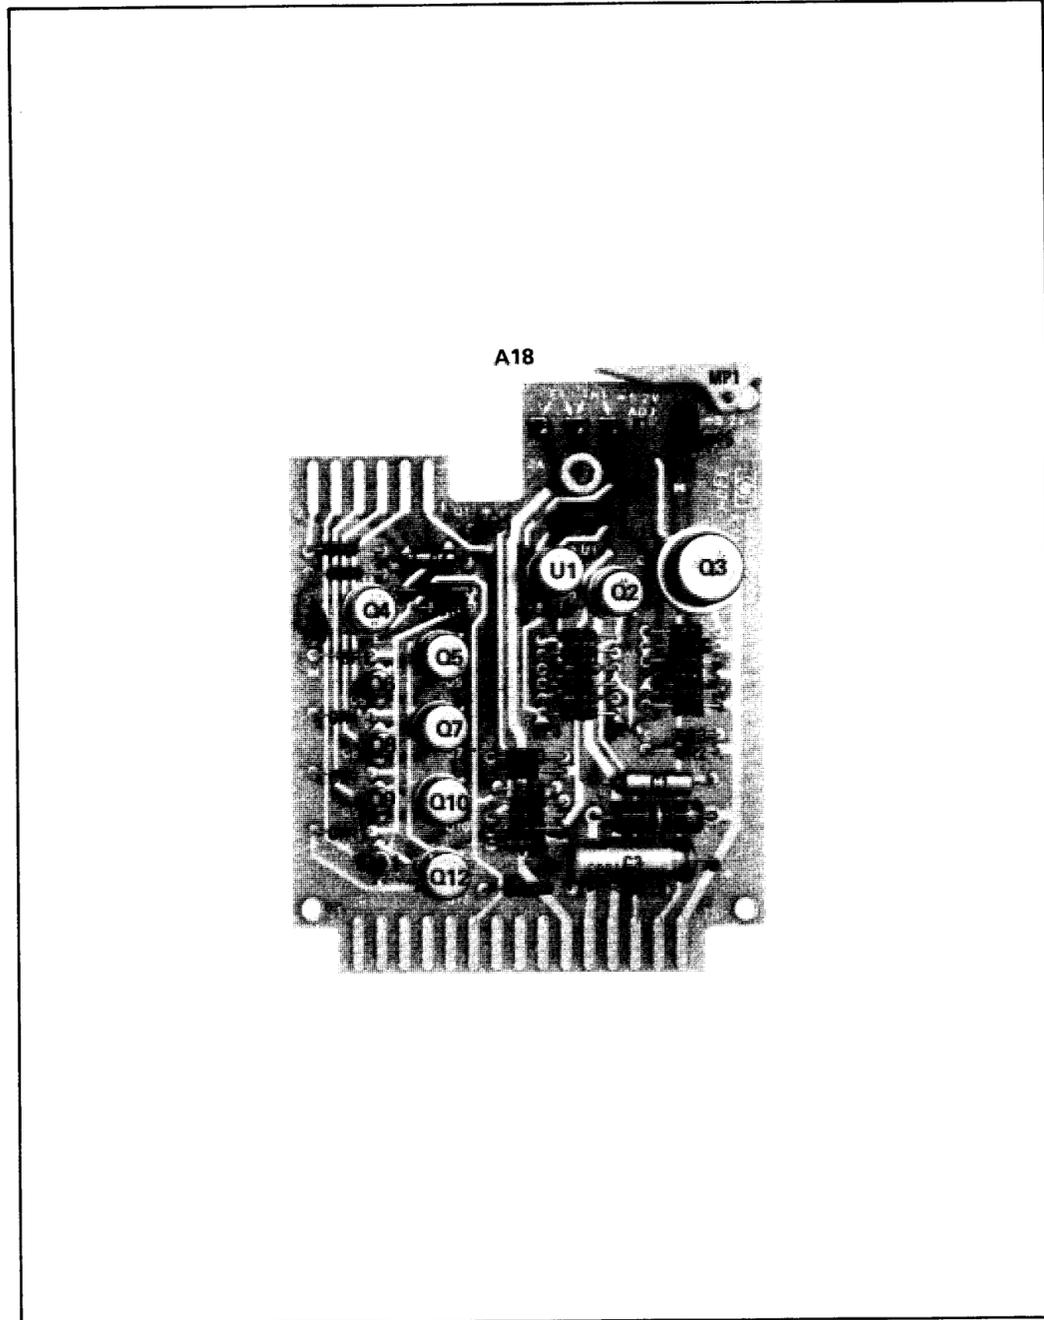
A18 -5.2V Regulator and Fan Driver Assembly Component Locations
